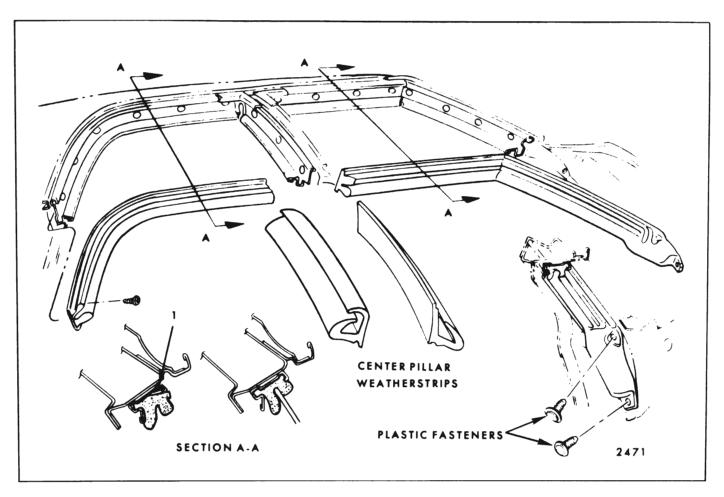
Side Roof Rail and Center Pillar Weatherstrips - "C-69" Styles
